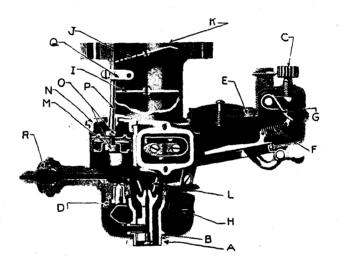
Sectional View of Type 61 Carburetor, Single Thermostat Type
